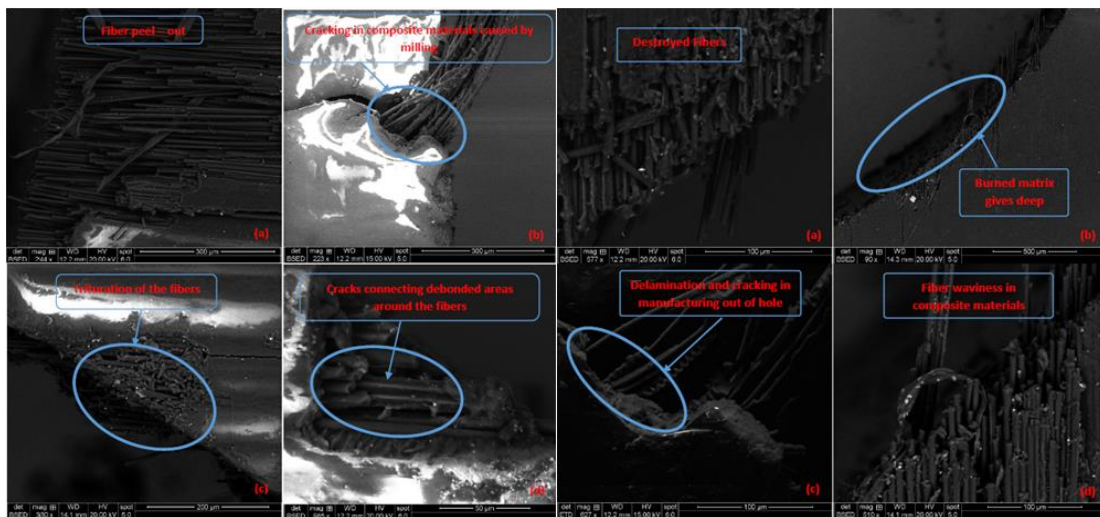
Images obtained by SEM in the holes machined with HSS drill ($\varnothing = 8\text{mm}$).
